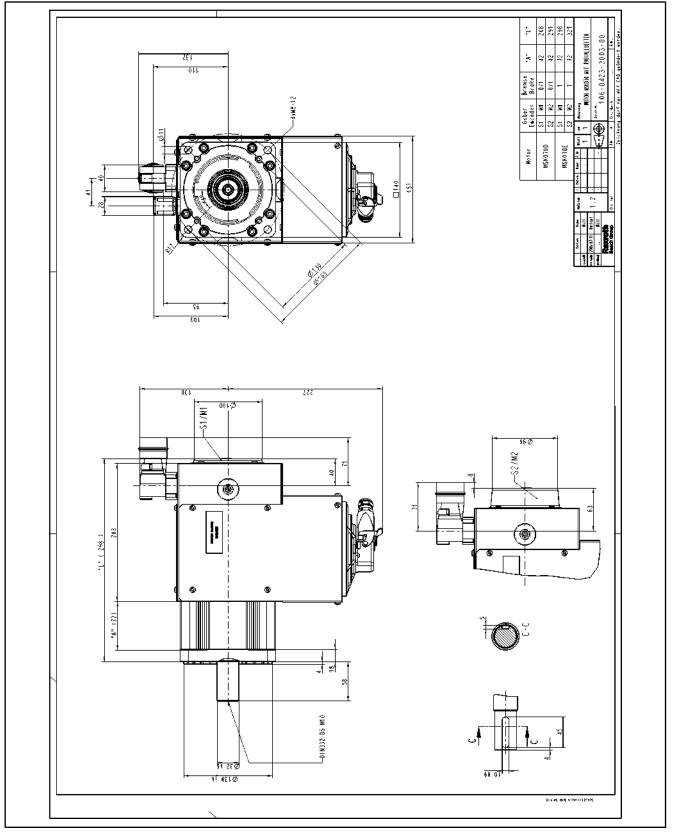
Dimension sheet MSK070 with radial fan unit
